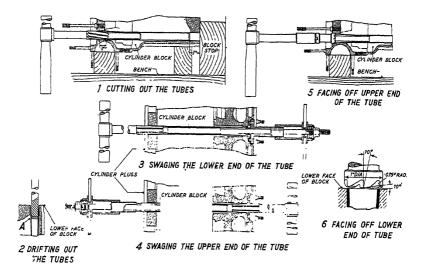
REMOVING AND REPLACING GUARD TUBES.
